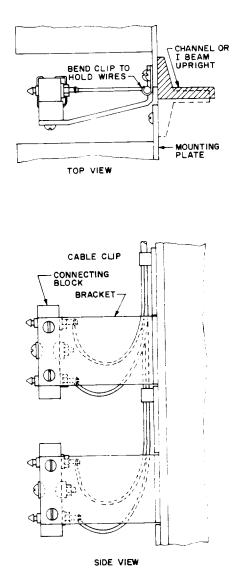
Connecting Blocks—33 and Similar Types on Relay Racks
